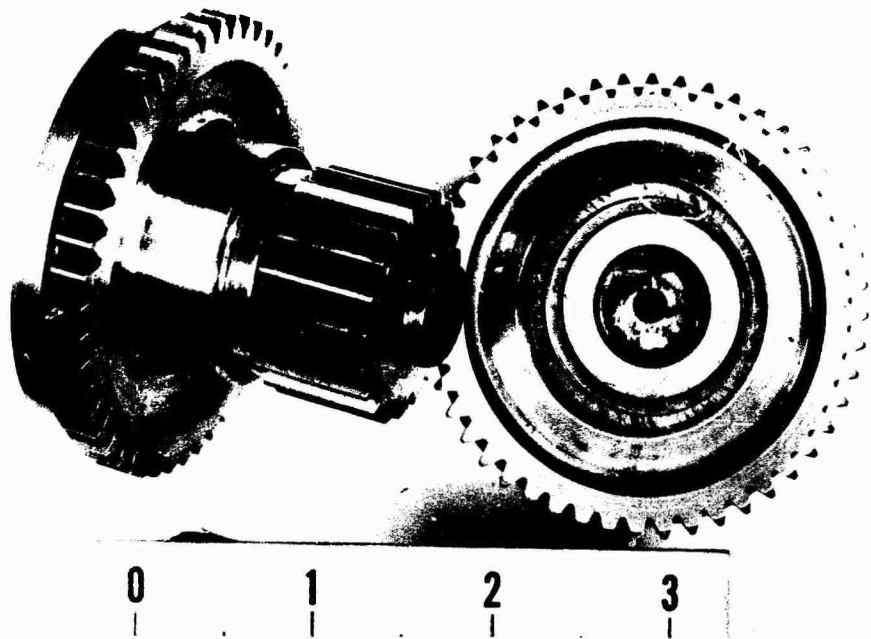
INNER PLANETARY GEAR ASSEMBLY -
